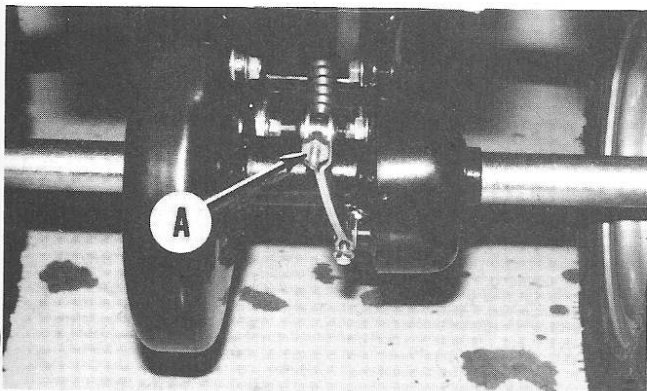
Brake adjustment is accomplished by rotating adjuster (A) at rear of vehicle.
